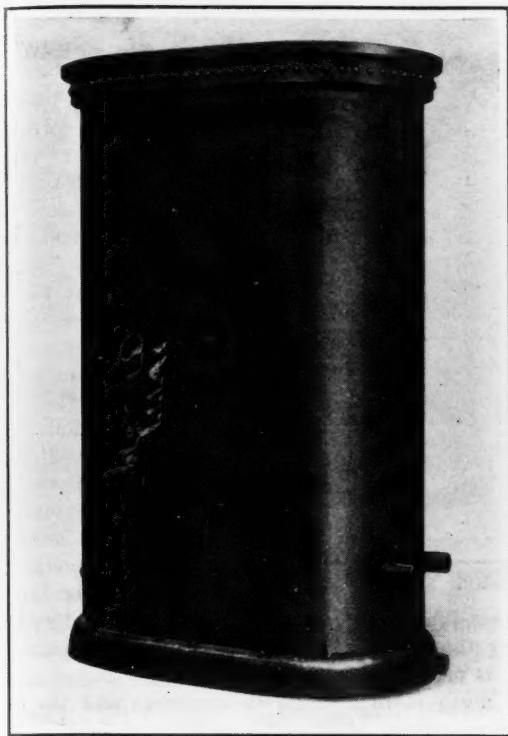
Base of Tank with Space between Base and Shell and Spot-welds holding Base and Shell together
